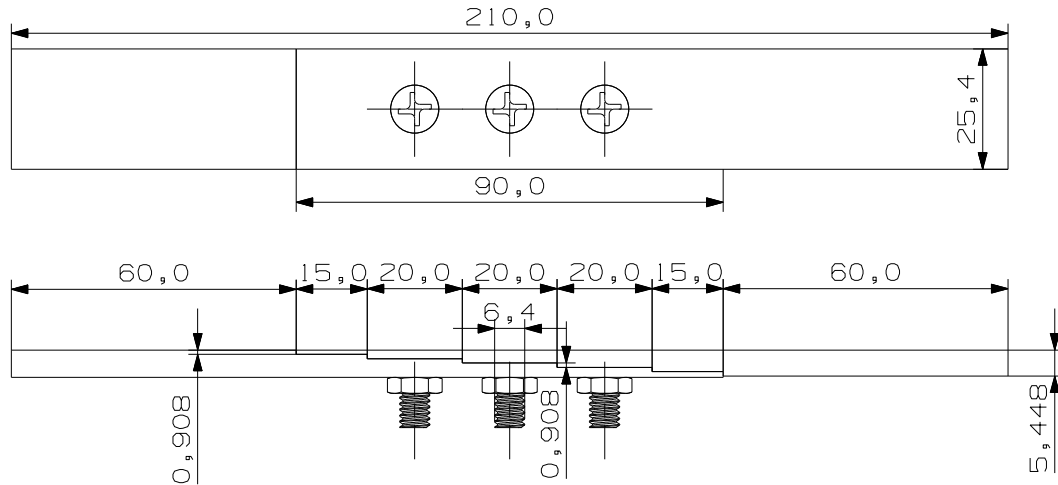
Step lap joint containing three bolts in a single column array; dimensions in mm
